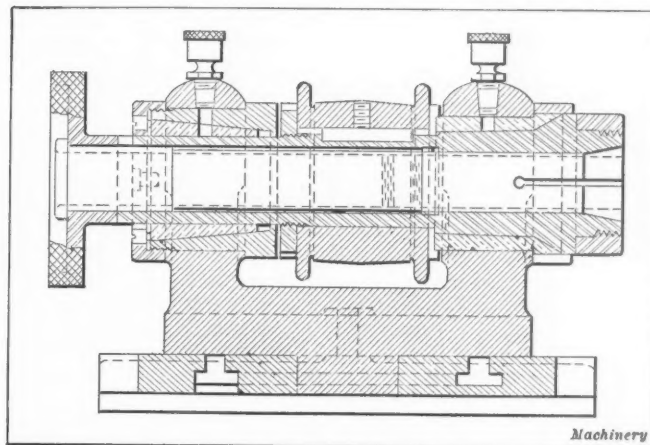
Cross-sectional View of Headstock of "Capital" Internal Grinder
